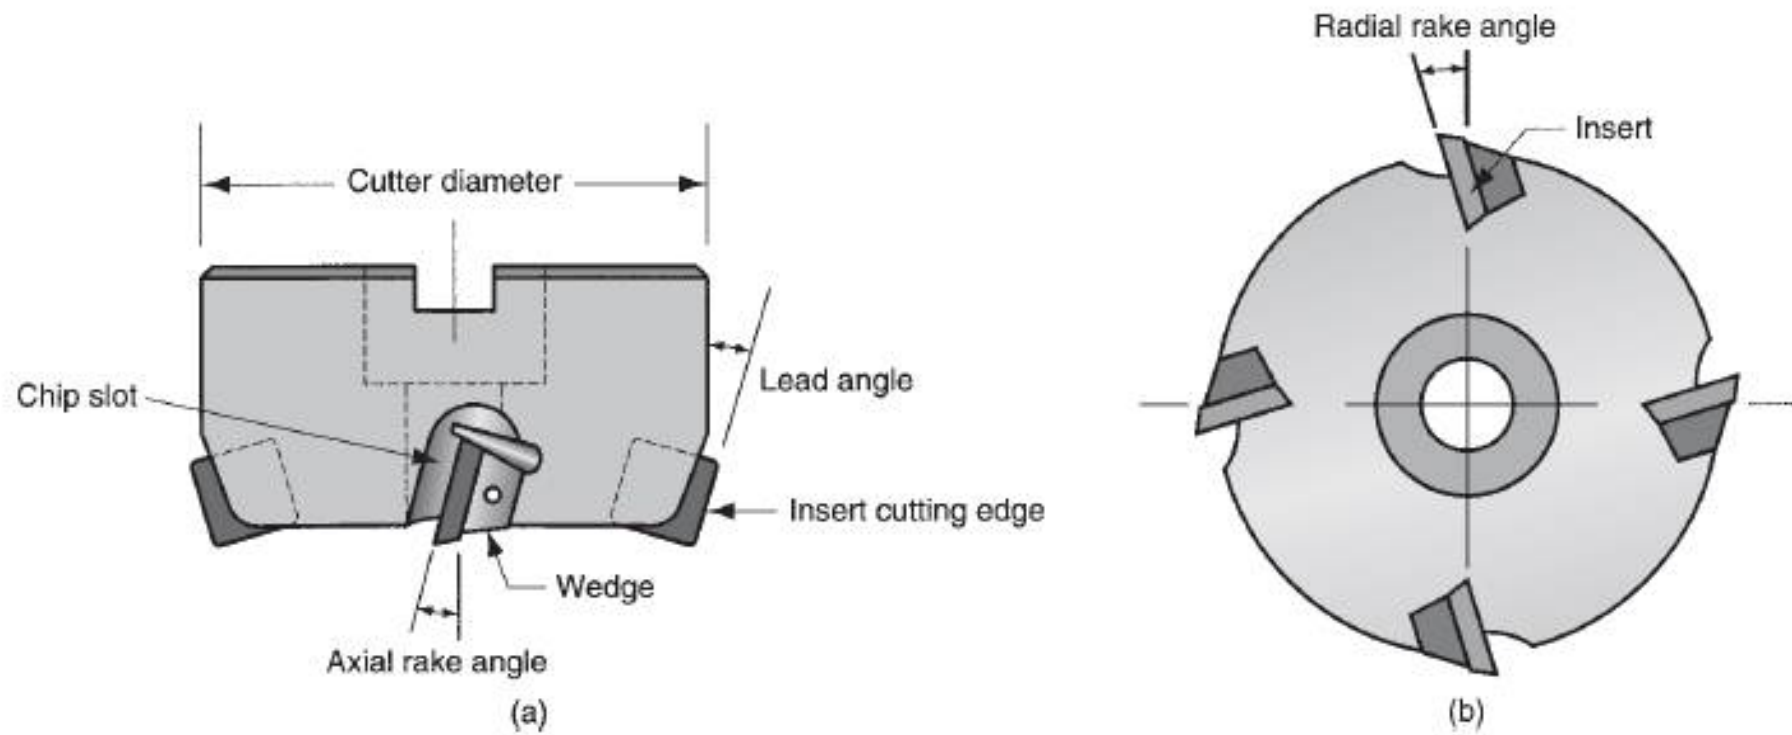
Tool geometry elements of a four-tooth face milling cutter: (a) side view and (b) bottom view.
